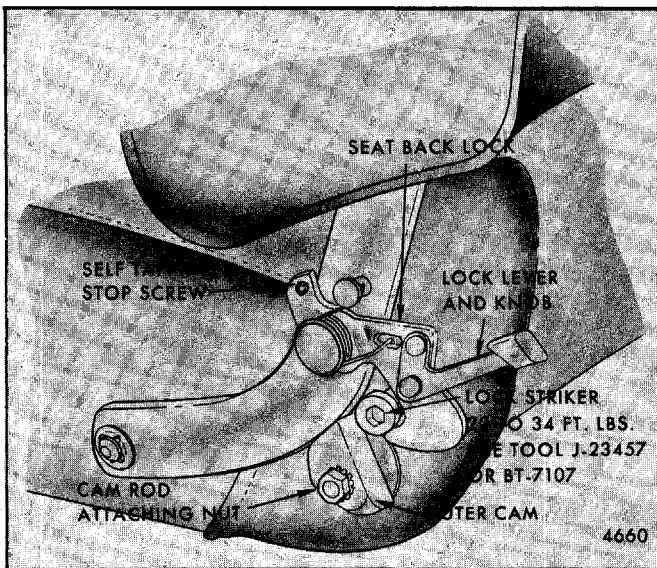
Adjustable Driver's Seat Back - Driver's Side Only
